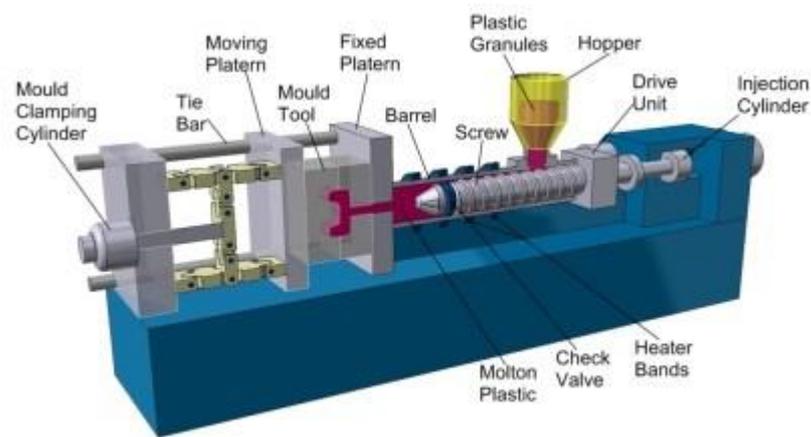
Injection Moulding Machine (N. Sreenivasulu 2013).
